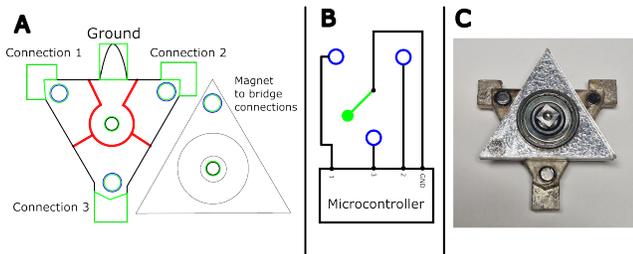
A wheel of fortune example application created with LaCir, comprised of individual pieces connected using ball bearings, screw inserts and magnets. The cut schematic shows tracing cuts (red) that separate the segments, and a donut-shaped cutout for the press-fit ball bearing insert (A). The circuit diagram highlights the top layer (green) that spins with a magnet on the end, connecting to one of three endpoints (blue) (B). This is visible in the fully assembled device (C).
